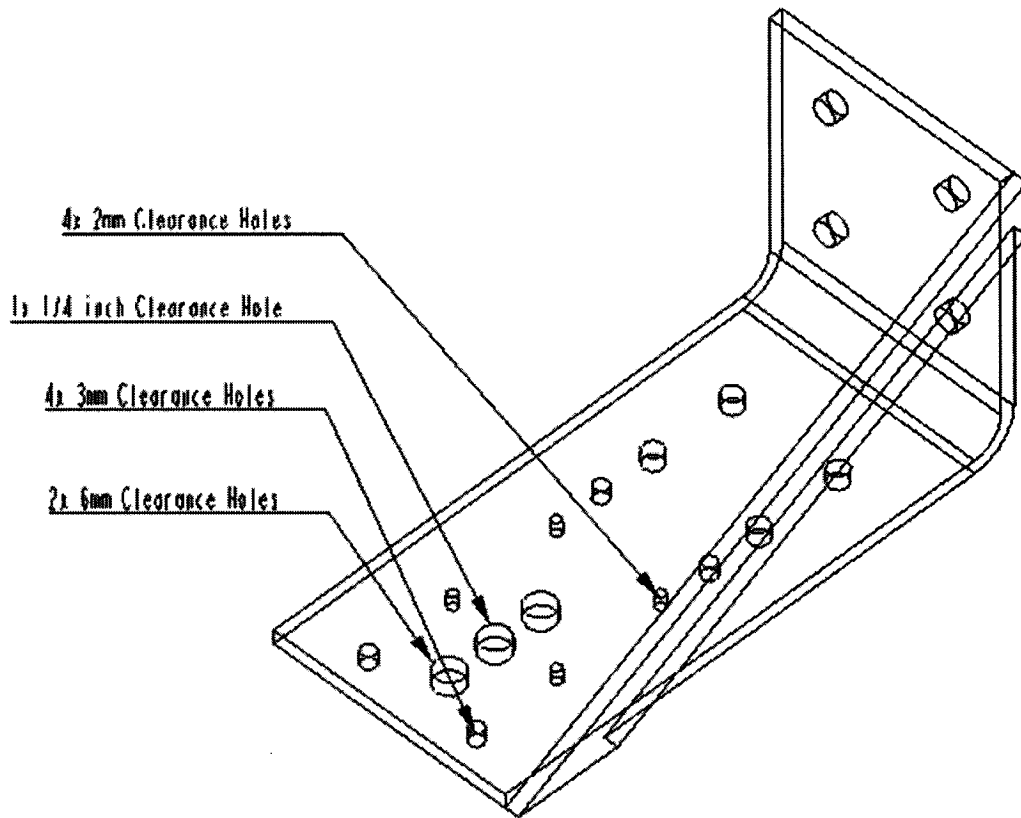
Orthographic view of the measurement head labeling the size of attachment holes - the holes used for attaching the measurement head to the robot end-effector plate are no. 10 clearance holes.
